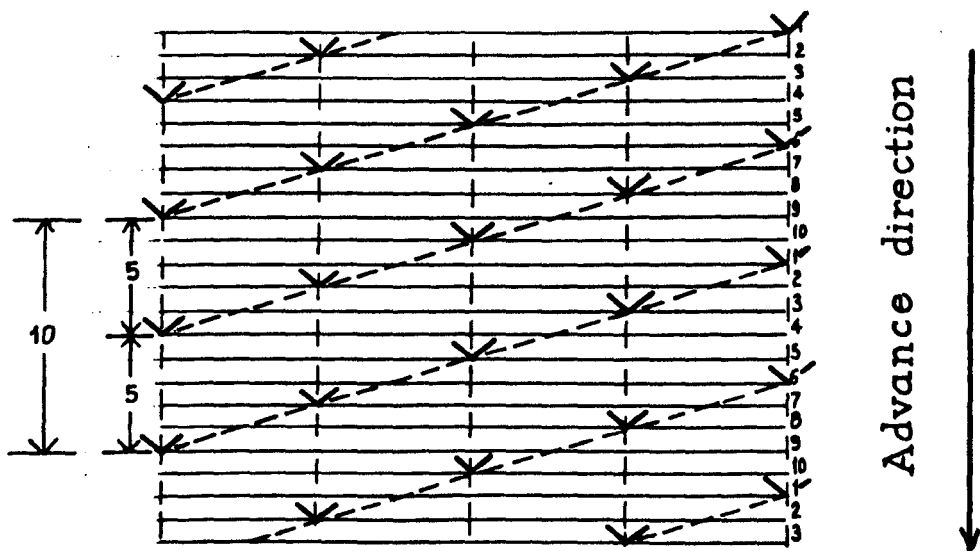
Tool lacing pattern of a simple drum with one tool per line.
